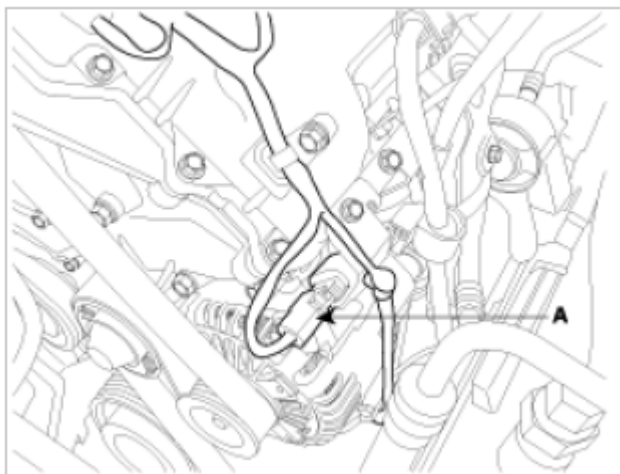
Identifying LH Front Oxygen Sensor Connector
